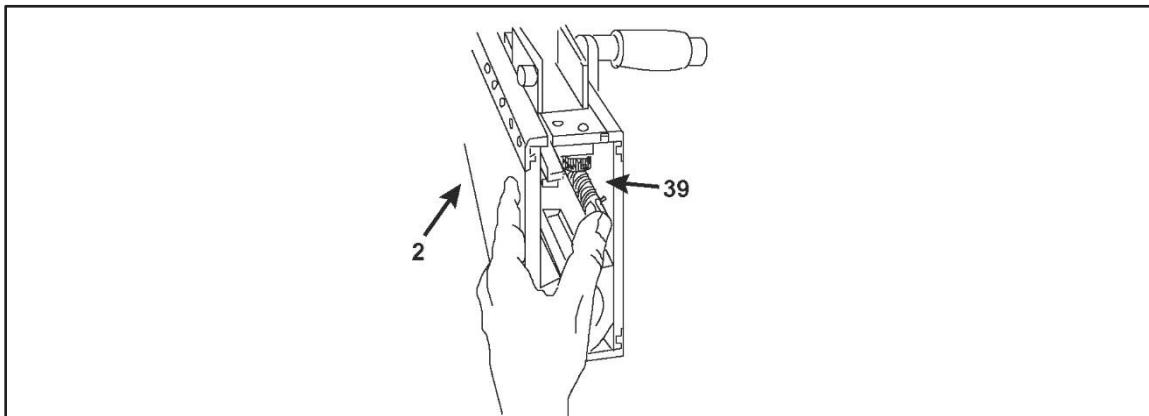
Installing the bolt and barrel extension and buffer assembly into the receiver
